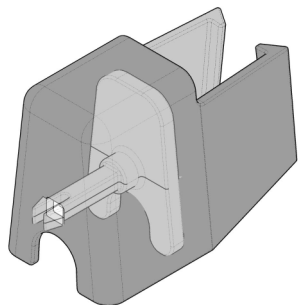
See-through drawing of a Luer retention clamp (spring not shown)
